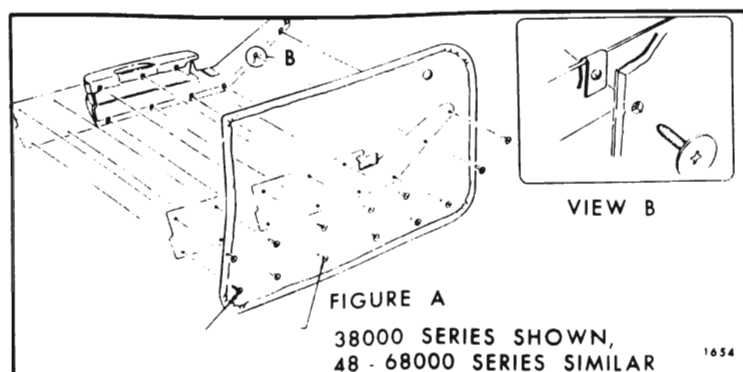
Arm Rest to Door Trim Pad Installation
